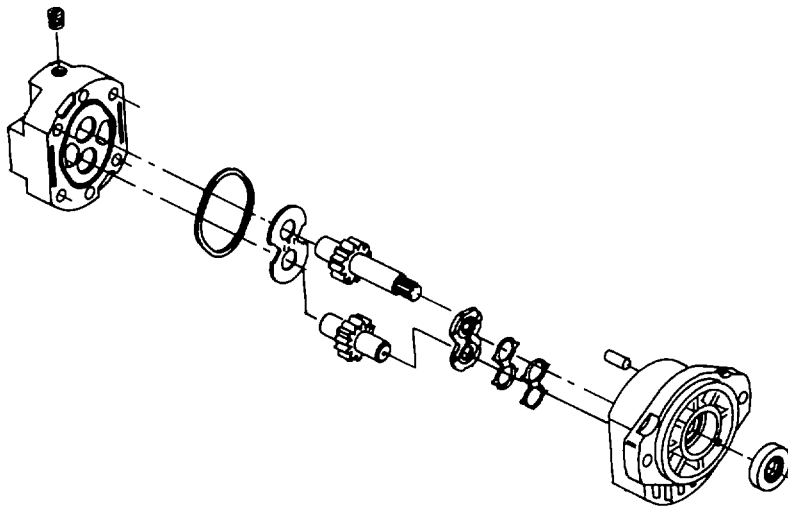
Hydraulic Pump Assembly (Sheet 1 of 2).
